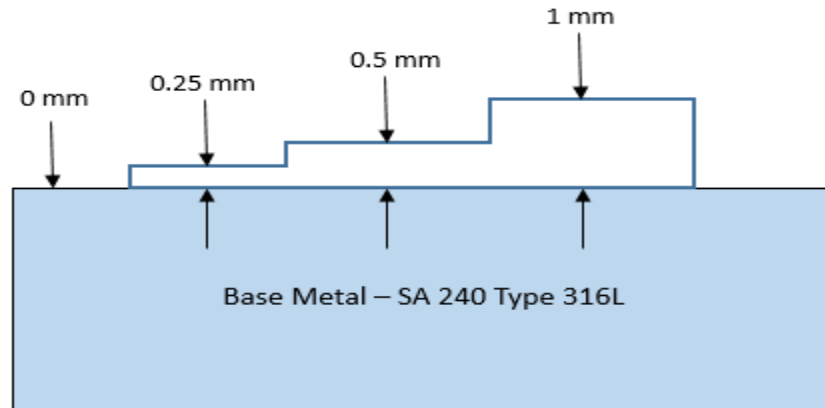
Weldcladding Machining for Chemical composition study
